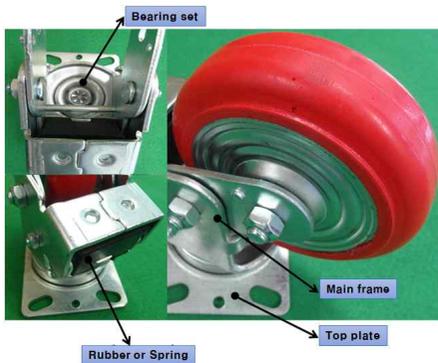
Components and assembly of the heavy duty shock absorbing caster
